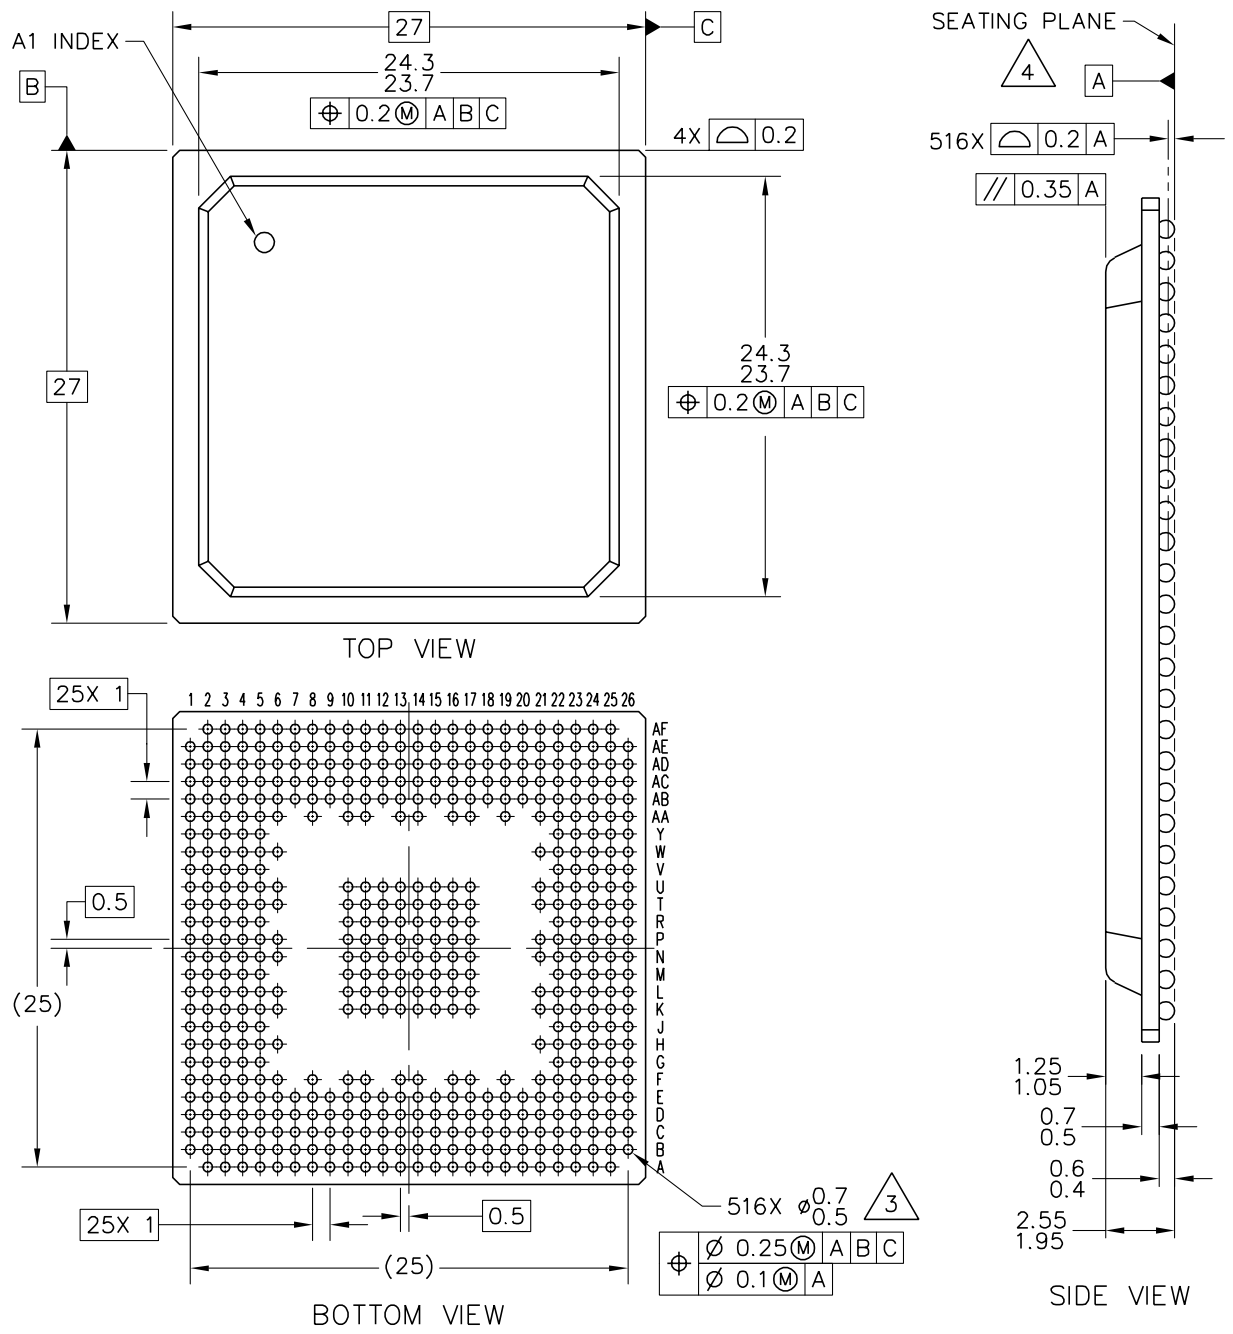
Mechanical Dimensions and Bottom Surface Nomenclature—480 TBGA
